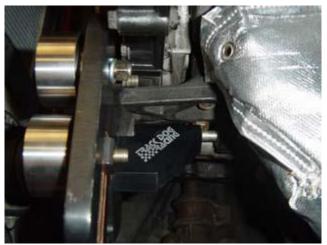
Install long P/S bolt through TDR Power Steering Delete Bracket.
